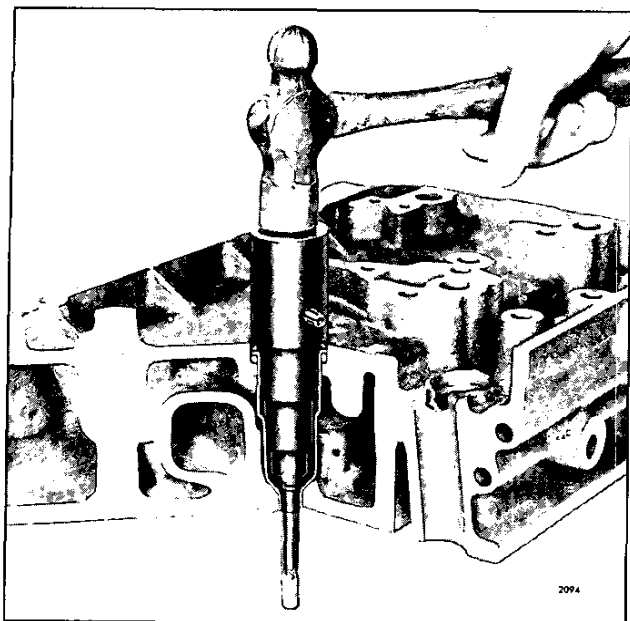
Installing Injector Tube Using Tools J 5286-4A and J 5286-5
